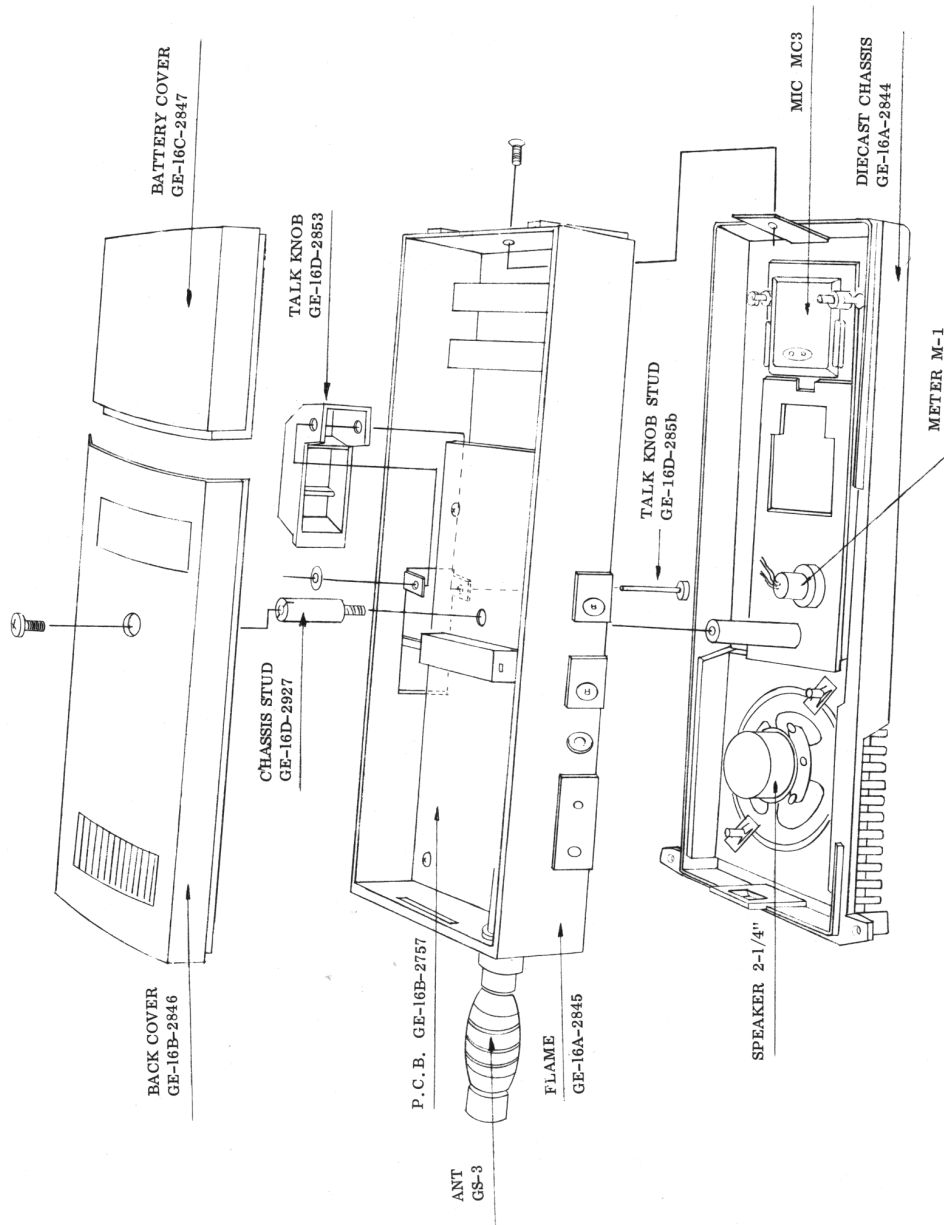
DIECAST CHASSIS DISASSEMBLY
